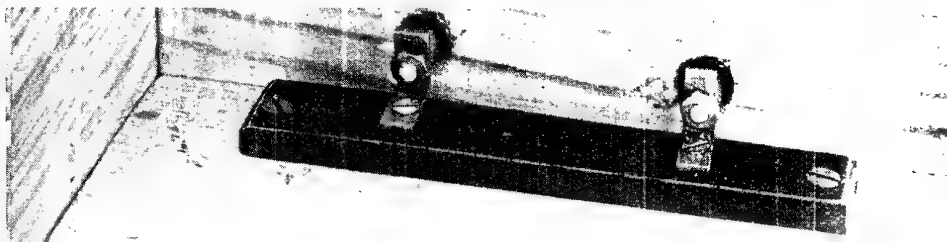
Inside the cabinet may be seen the ebonite base plate and mode of supporting the socket in Fig. 2. Wiring may also be carried out by soldering leads to the brass angle pieces
